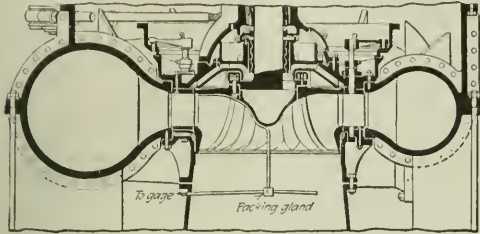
LOCATION OF PITOT TUBE IN RUNNER
